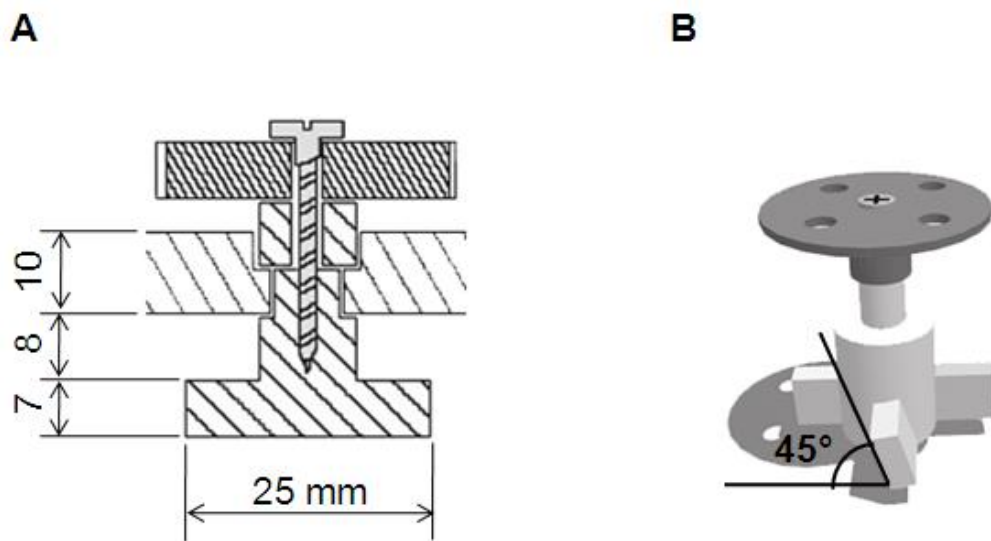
(A) Section of the impeller embedded in the polycarbonate lid. (B) Three-dimensional representation of the impeller, shaped as a turbine with 45°-pitched blades.
